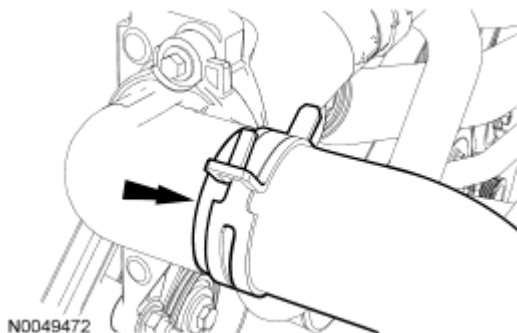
Disconnecting Upper Radiator Hose From Thermostat Housing
